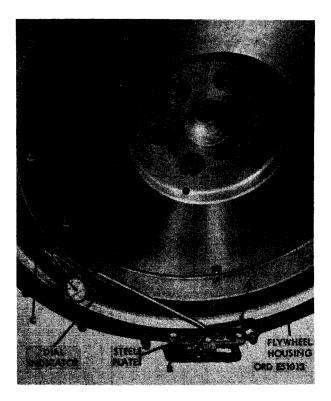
REAR FLANGE OF CRANK-SHAFT WITH FABRICATED PILOT INSTALLED.
